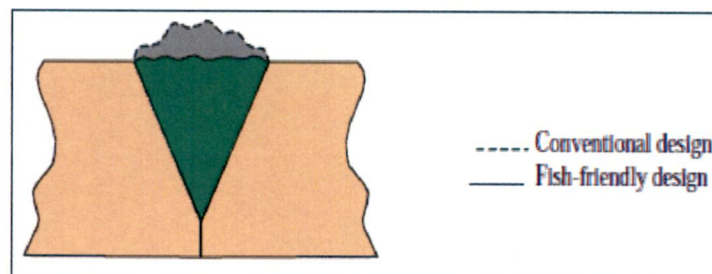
Schematic of a rough weld joint smoothed over for fish safety.
